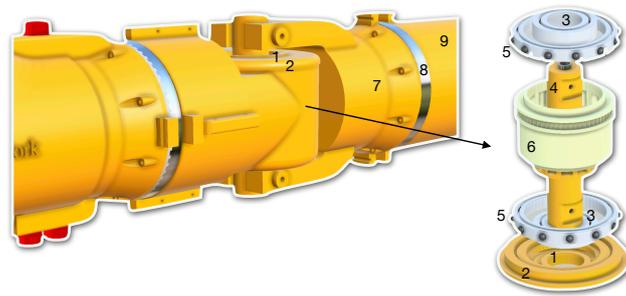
Body parts comprising a segment: 1- Inner joint housing lid; 2- Outer joint housing lid; 3- Zirconia ceramic bearing; 4- Driven shaft; 5- Stainless bearing; 6- Driving shaft; 7- Electronic
